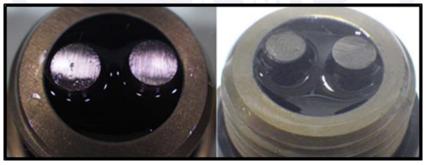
Chip detectors of the reduction gear box (on the left) and of the accessory gearbox (on the right).
